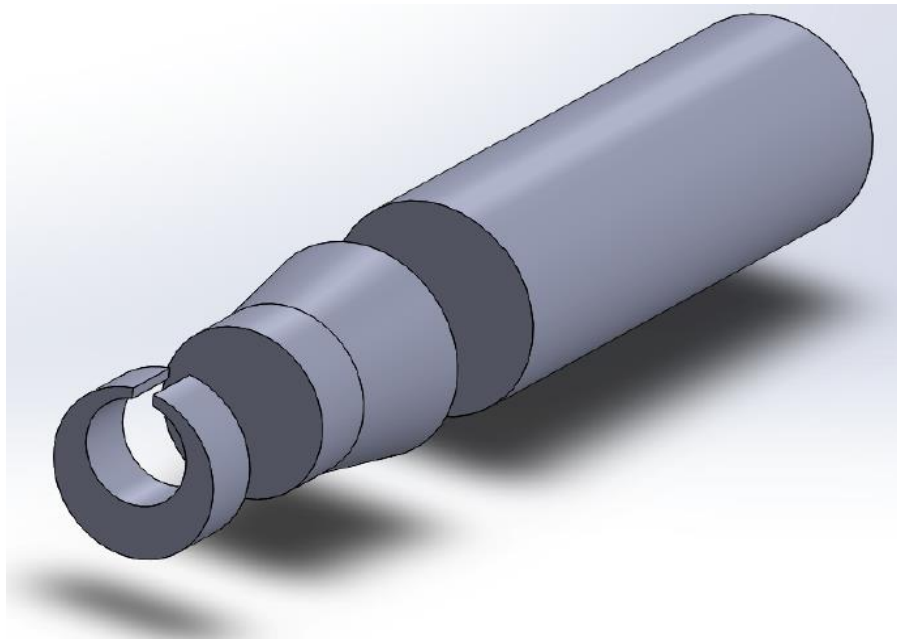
Illustration of fabrication of Navy C-ring specimen by CNC lathe.
